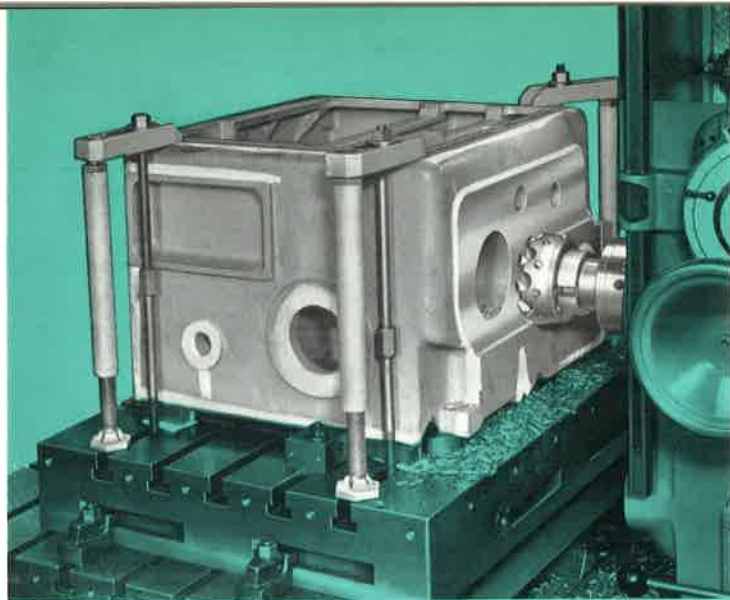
, above. Milling and boring lathe headstock on Model 3H-48 JIGMIL.
